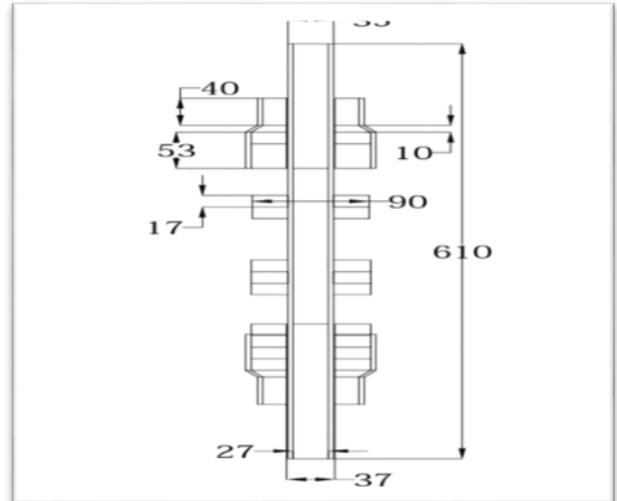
DESIGN OF MAGNETIC SUSPENSION IN AUTOCAD 2D (DIMENSIONS)
